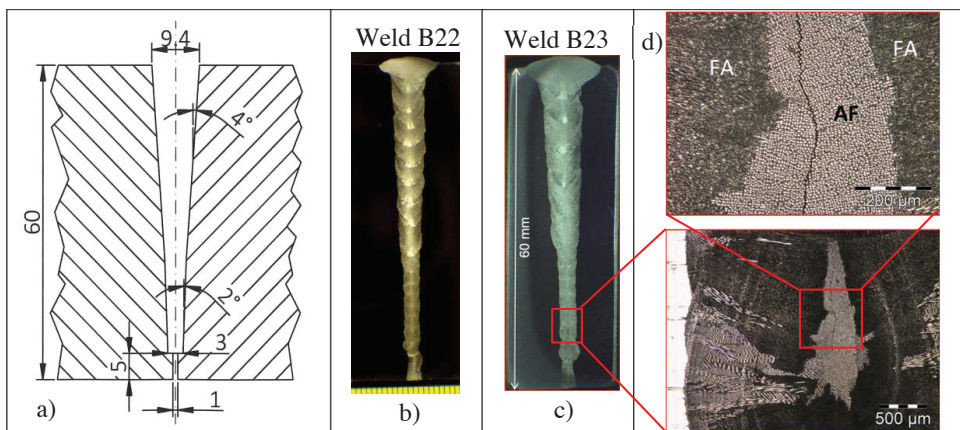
a) Groove geometry used in gap filling multi-pass tests: both cold wire and laser-arc hybrid method was used as described in Fig. 9. b/c) The corresponding weld macro cross-sections of multi-pass weld B22 and B23. d) Micrographs from the weld B23 exhibiting solidification cracking propagating in primary austenitic solidified region.
